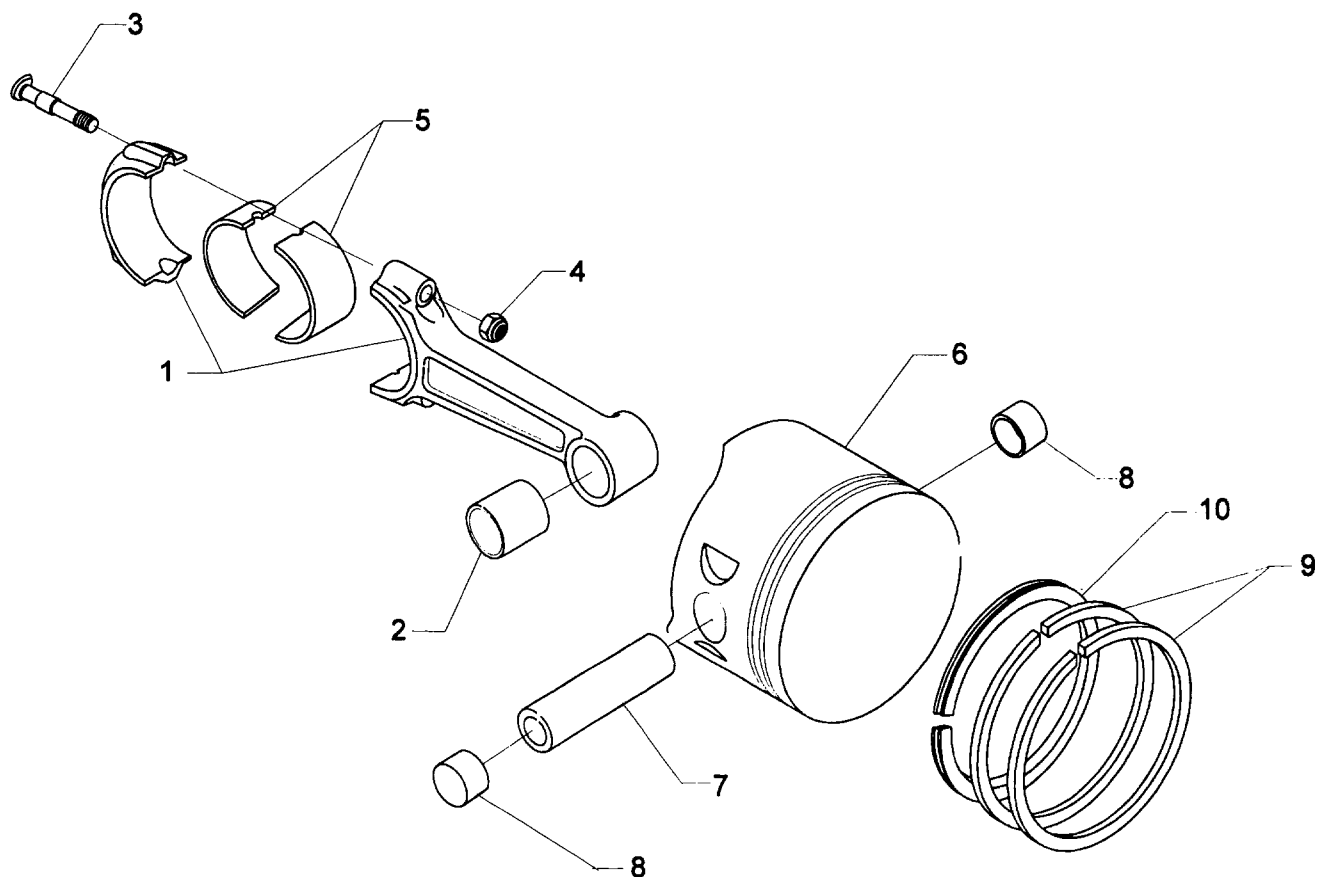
CONNECTING RODS, PISTONS AND RING ASSEMBLIES
